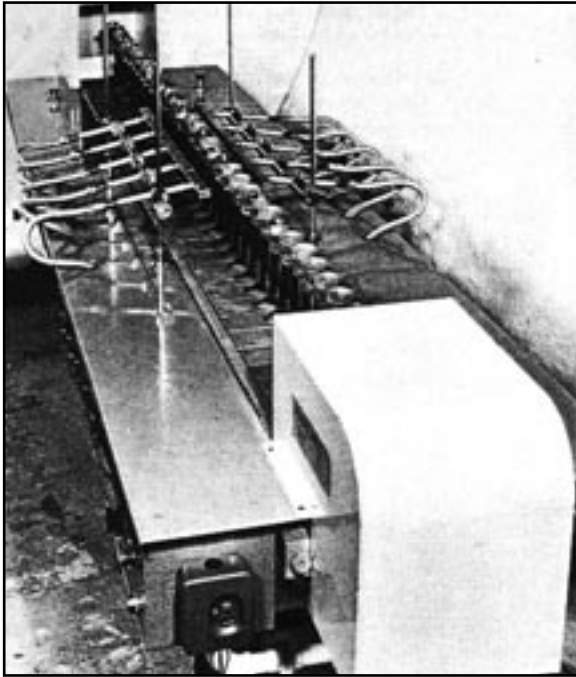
Indexing conveyor machine used to braze hydraulic hose couplings. The machine indexes 10 times a minute (Courtesy: Solbraze Ltd.)
